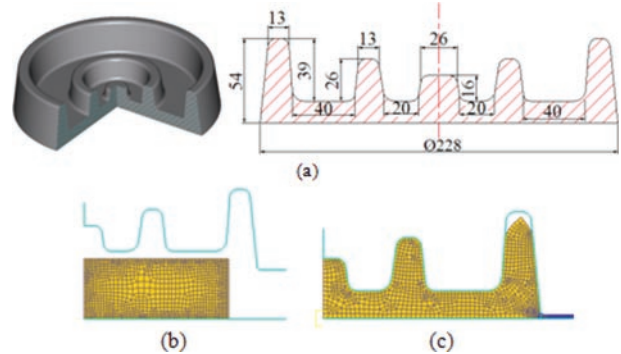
(a) Axisymmetric part with multiple ribs; (b) forging process without preform; (c) defect in forging process
